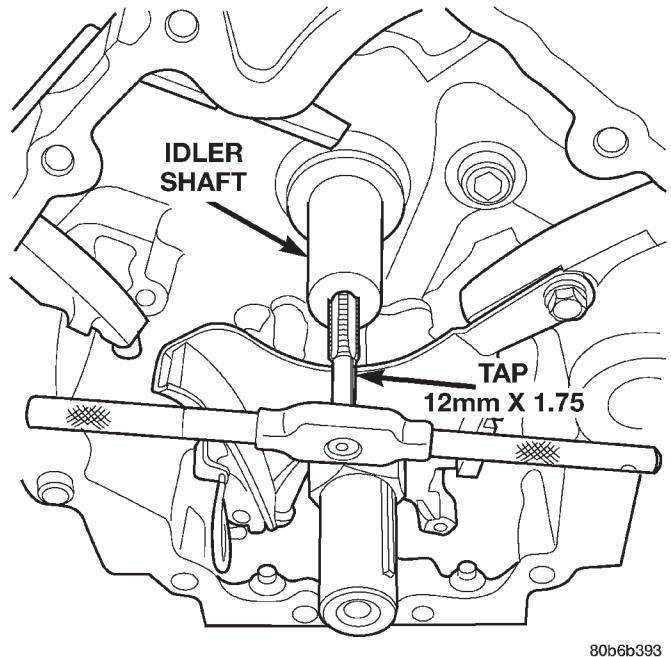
Tapping Idler Shaft For Special Tool 8517
